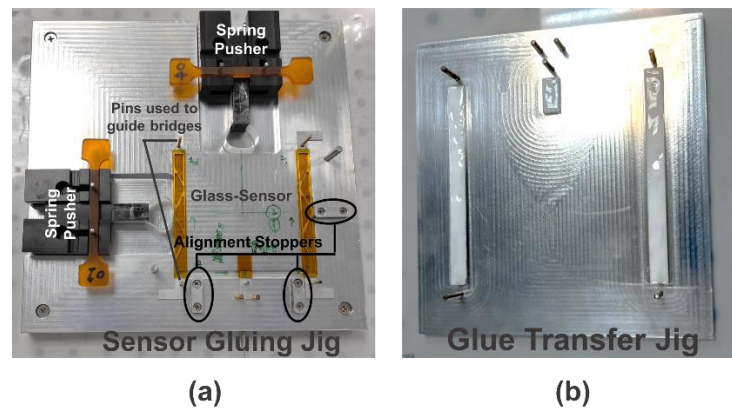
Jigs used in bare module assembly. (a) Sensor gluing jig. (b) Glue transfer jig.
